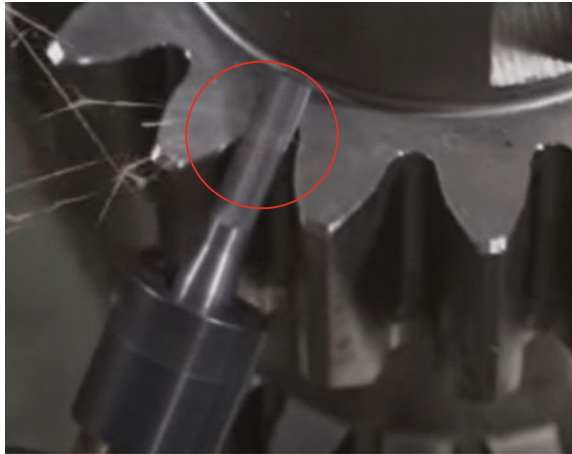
Liebherr Toe and Heel chamfering of a helical gear
